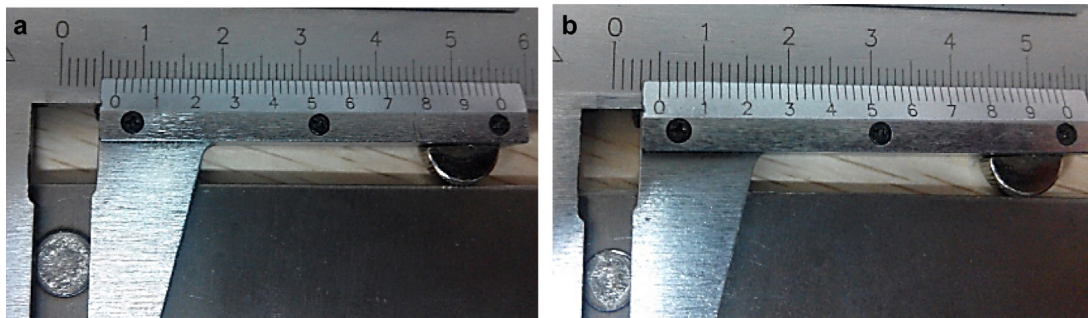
Photographs of measuring the nugget size of (a) the qualified welding spot and (b) the weld spot with incomplete fusion.
